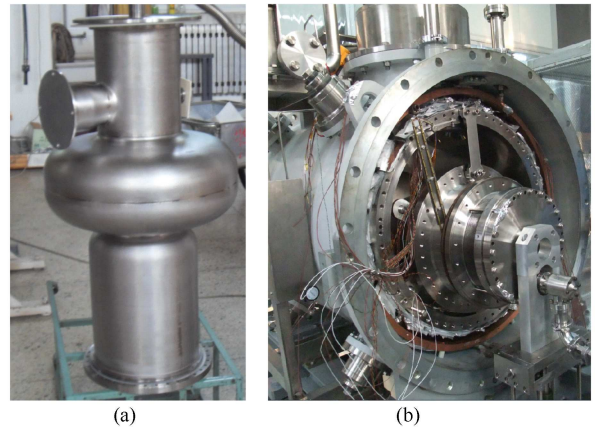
(a) 500 MHz spare cavity; (b) assembly of cryomodule.
